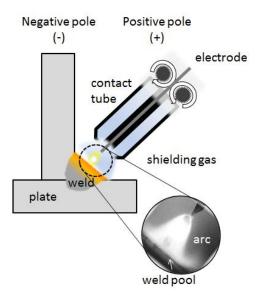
Principle of MAG welding illustrated for a fillet weld.
